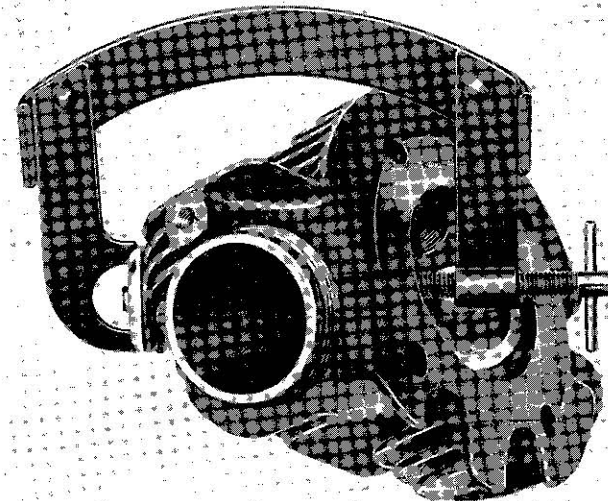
THE A.J.S. OVERHEAD VALVE EXTRACTOR
